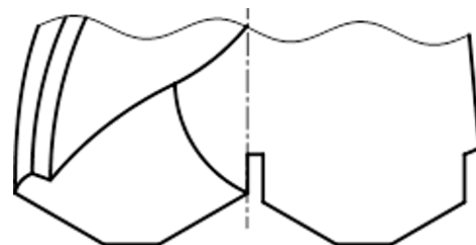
Double tip twist drill without cross edge with cut off tips.
